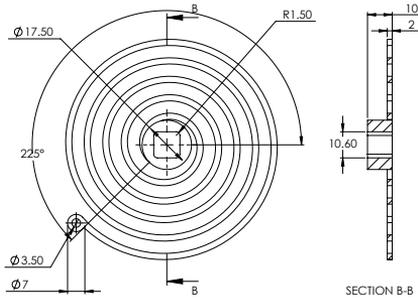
A detailed diagram showing the dimensions of the 3D printed hairspring used in the prototype.
